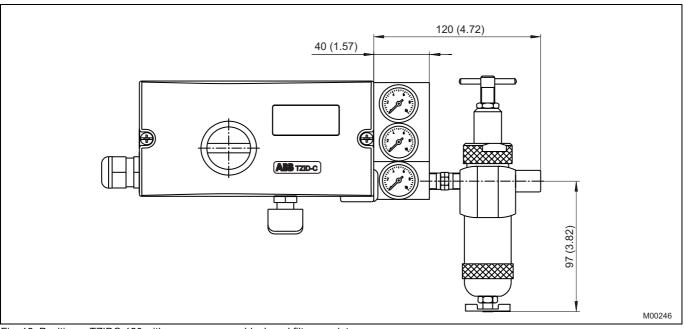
Positioner TZIDC-120 with pressure gauge block and filter regulator
